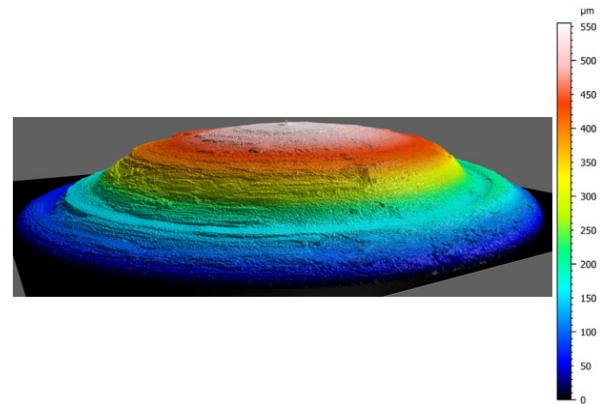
Microtopography of the tip of the welding tool used at 1.25 m/min and 1250 rpm, after 20 000 mm of weld
